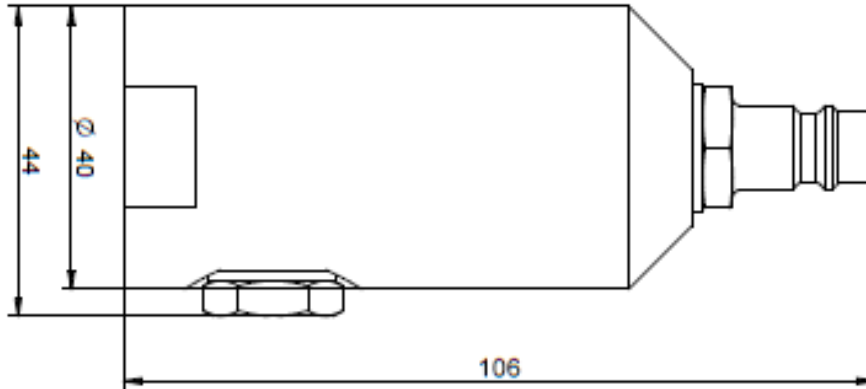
Dimensions (in mm) of the complete measurement chamber with LDP FC fixed valve.
